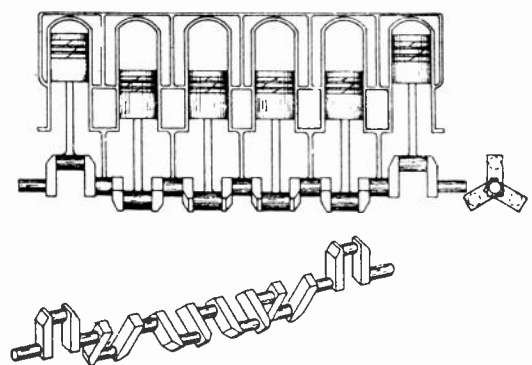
Diagram showing the design of the crank shaft and the arrangement of pistons for a six-cylinder engine. Note that the cranks are arranged in pairs 120° apart around the shaft.
